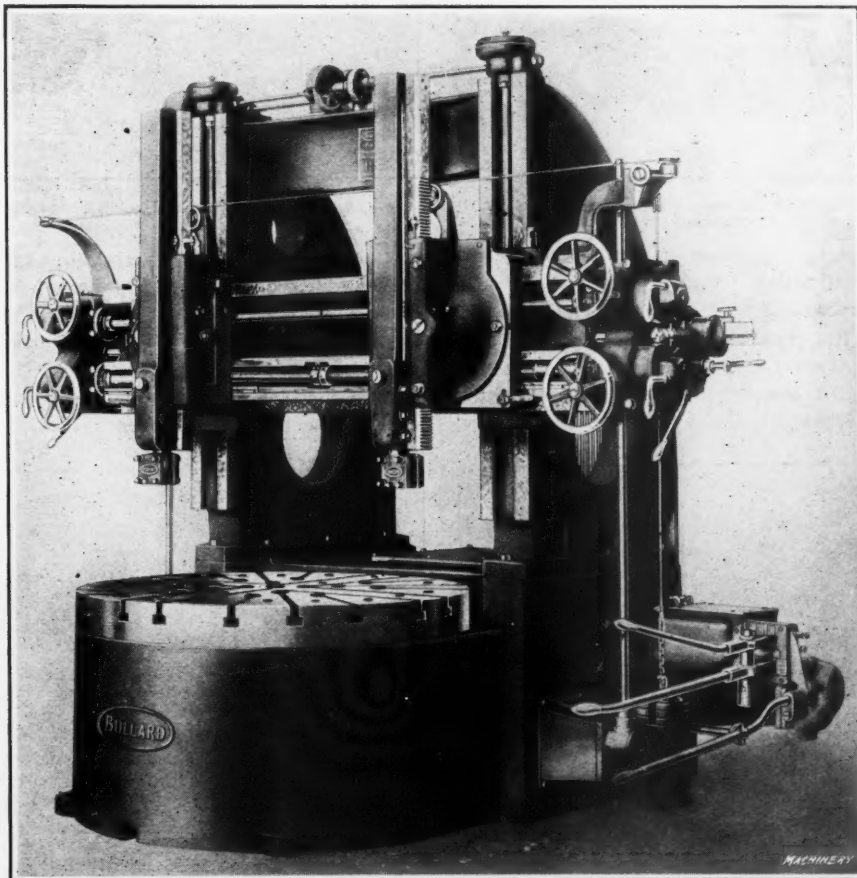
Sixty-one-inch "Maxi-mill" built by the Bullard Machine Tool Co. This illustration shows Speed Control Levers at Right-hand Side, Provision for traversing Heads and raising Rail by Power, and "Hammer" Handwheels for Fine Adjustment of Tools
